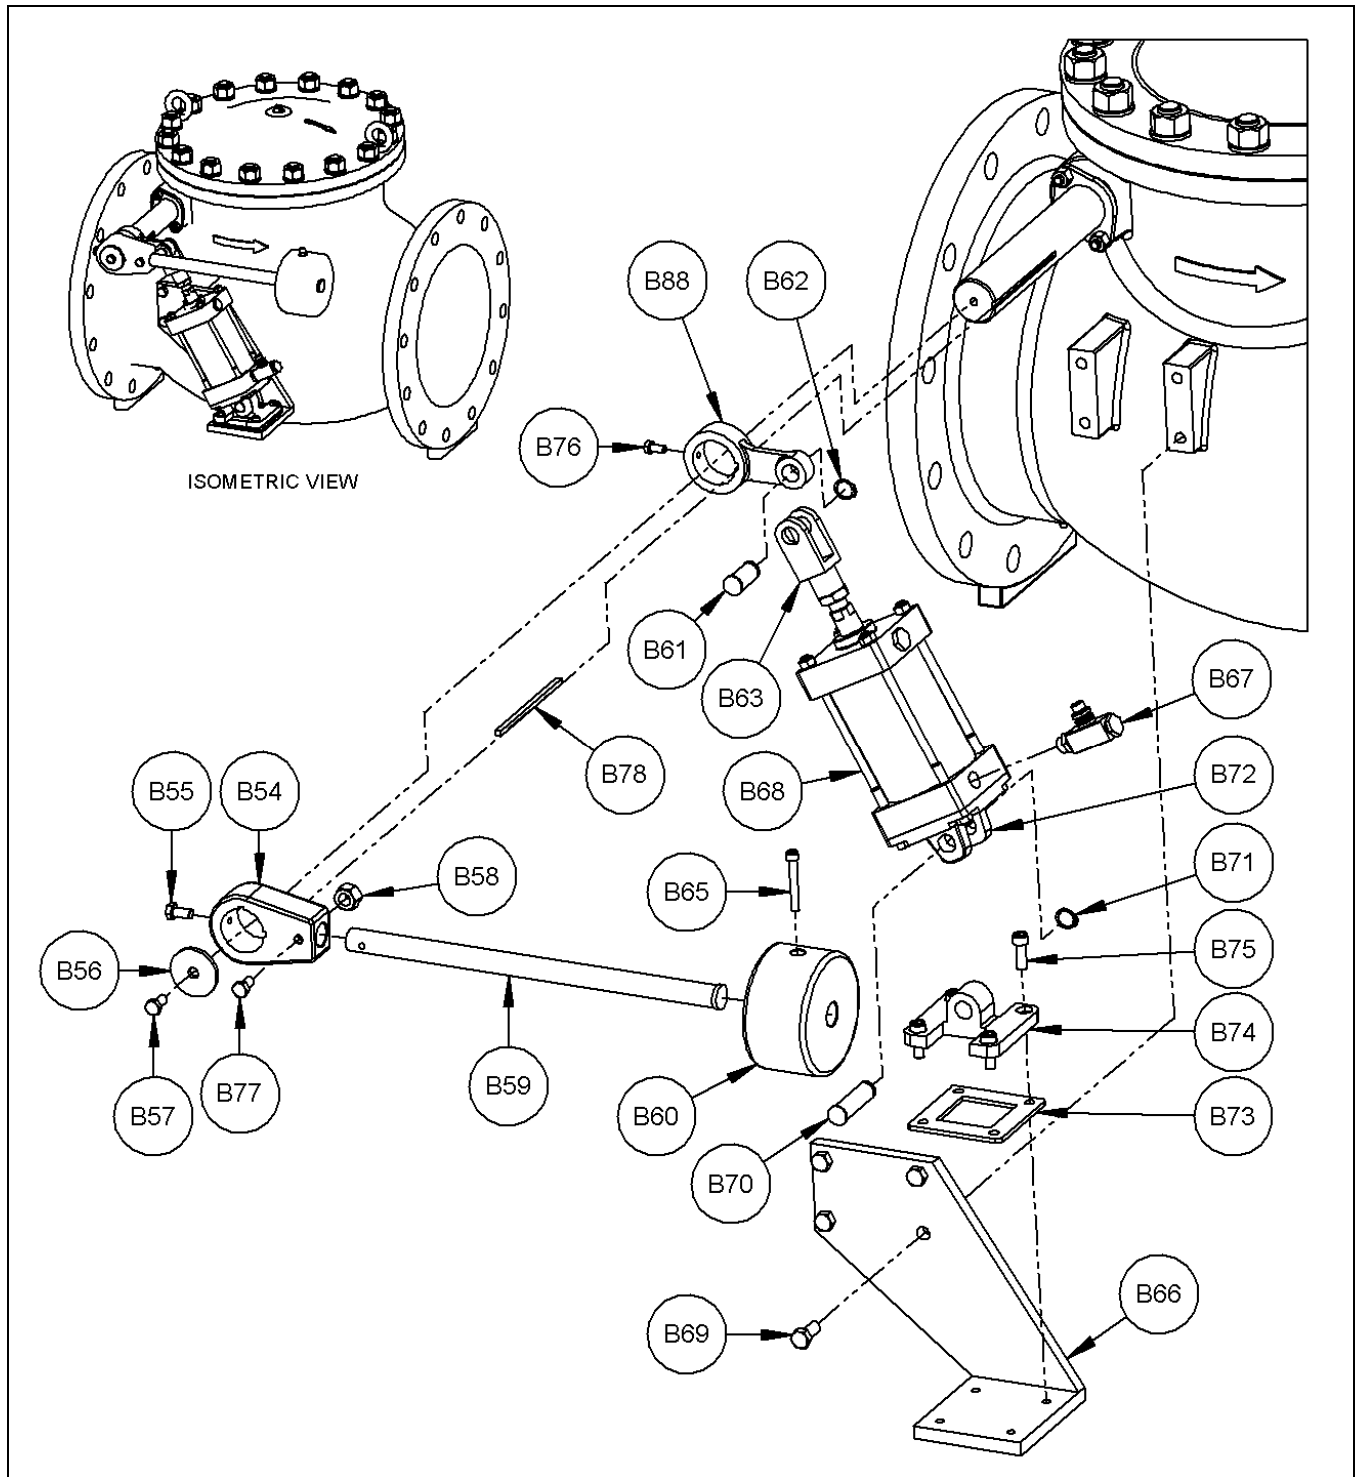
CVS-EDV Swing Check Valve (Air Cushion)
